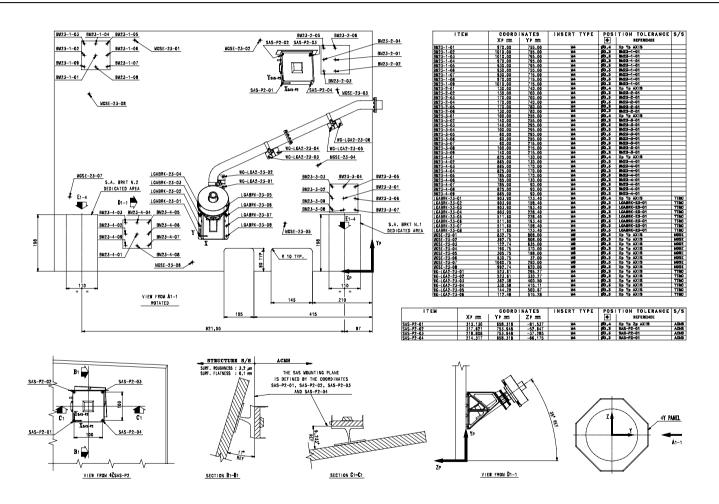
Planck +Y Lateral Panel (outside of the SVM).
